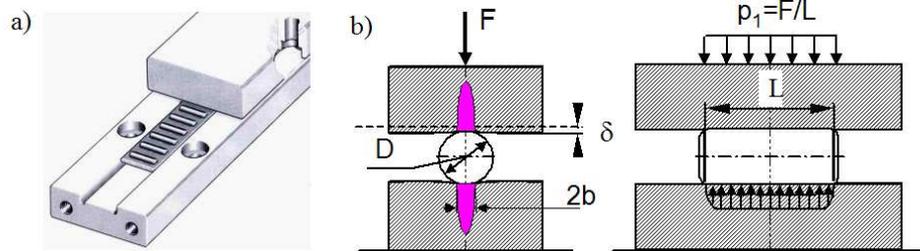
Linear roller guideway of a machine tool (a) and its basic calculation model (b)
